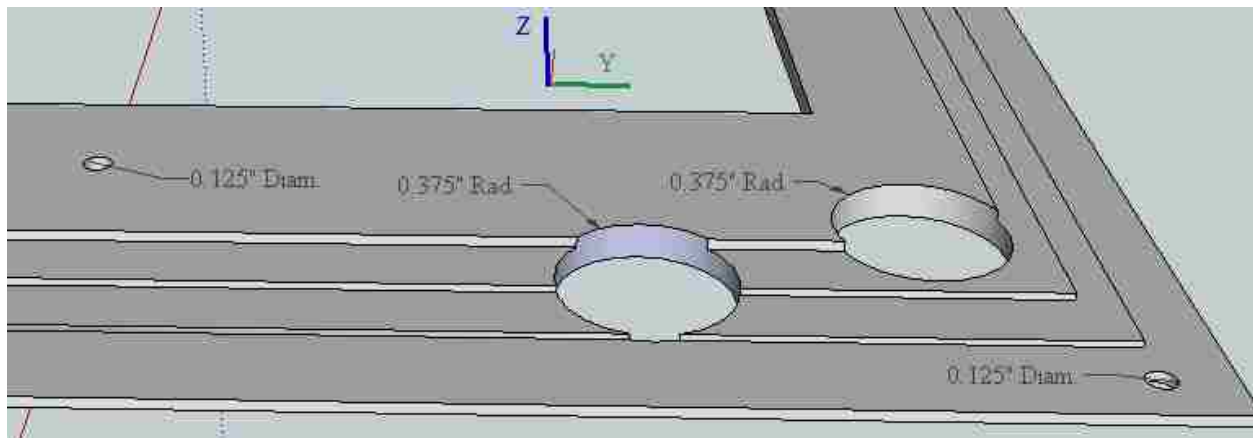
Orthogonal view of the 20x20 cm² upper trimmer lead plate illustrating hole dimensions.
